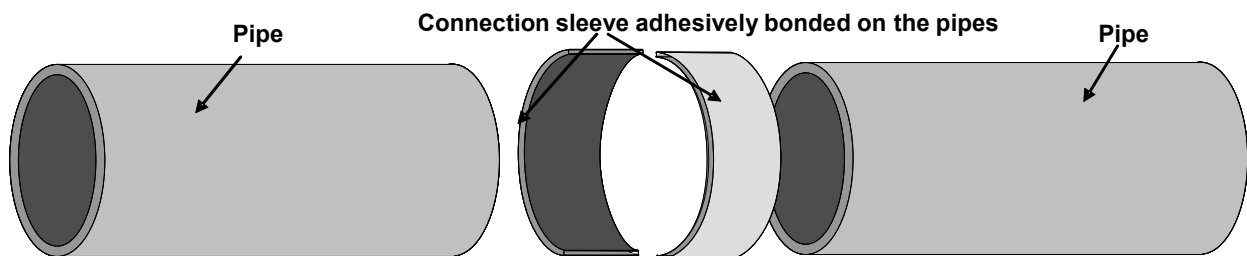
Developed joint design geometry for steel pipes up to 600 mm in diameter.
